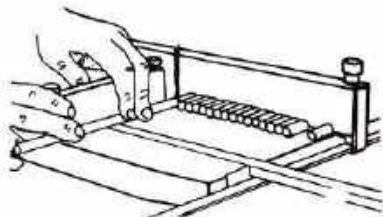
CUTTING SHORT PIECES WITH CROSS-CUT GAUGE
